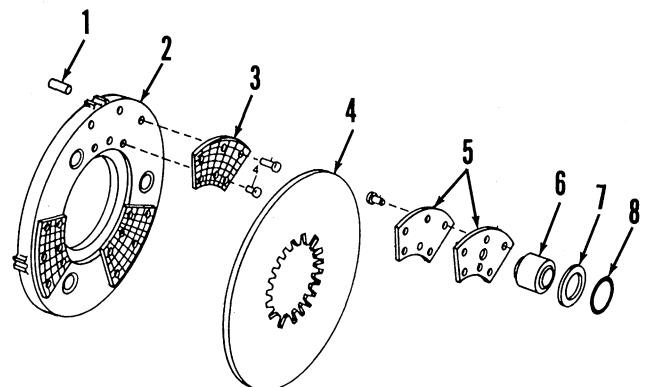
Exploded view of wet type hydraulic disc brake operating parts.
